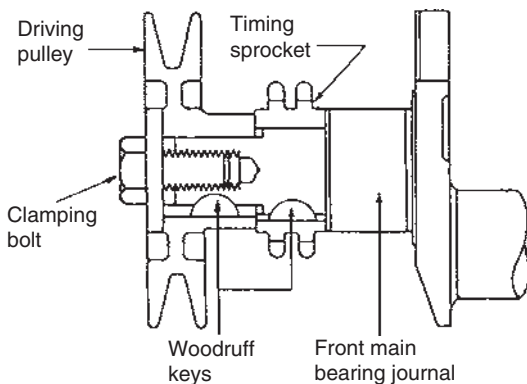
Attachment of timing wheel and pulley to nose of crankshaft
